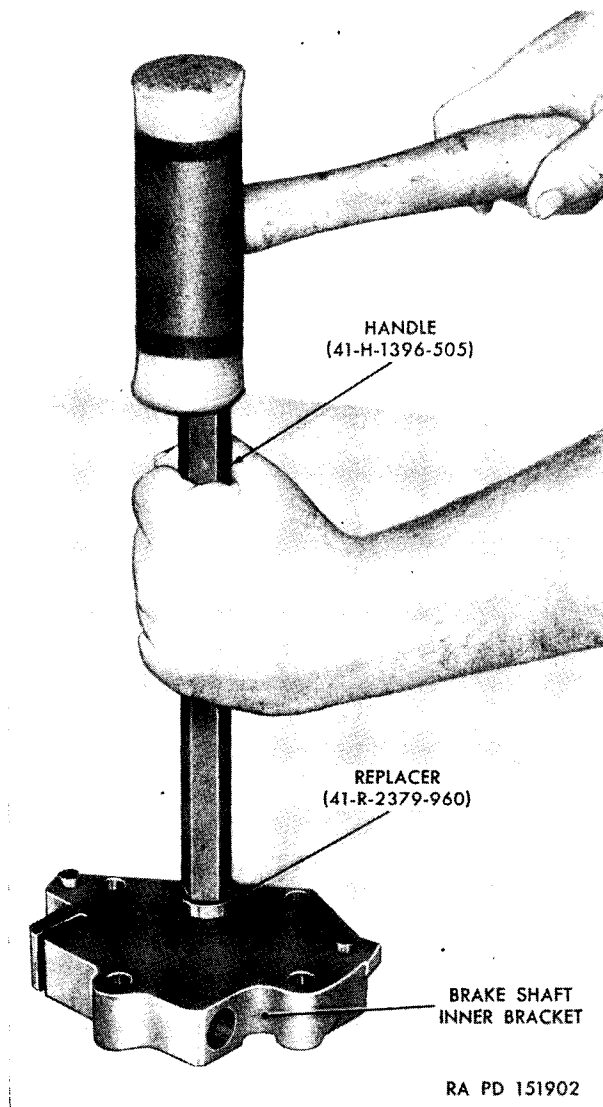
Installing brake-shaft-inner-bracket needle bearing.
